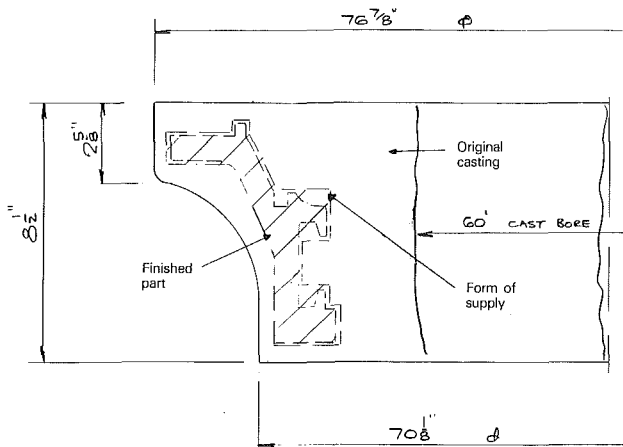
Possibility of producing finished part from large vertical shaped casting
